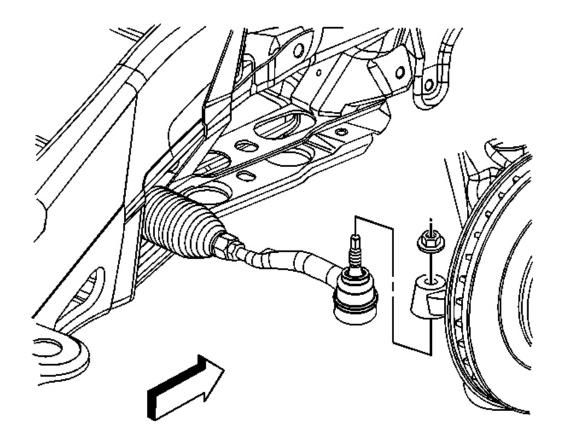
Removing/Installing Tie Rod Courtesy of GENERAL MOTORS CORP.
